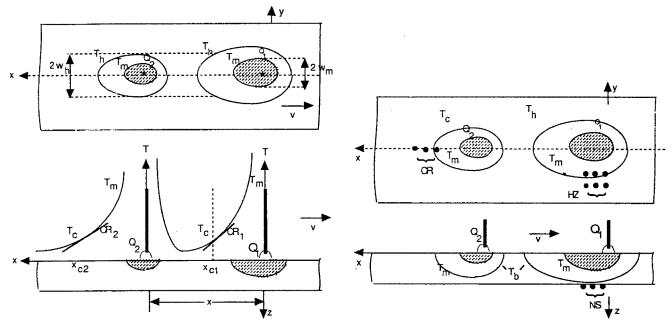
The double welding gun configuration and temperature field.
